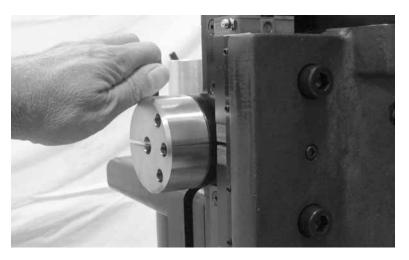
Loosen the feed lock lever enough to raise the spindle assembly with the feed handle. Tighten the lock when installing the tooling.
